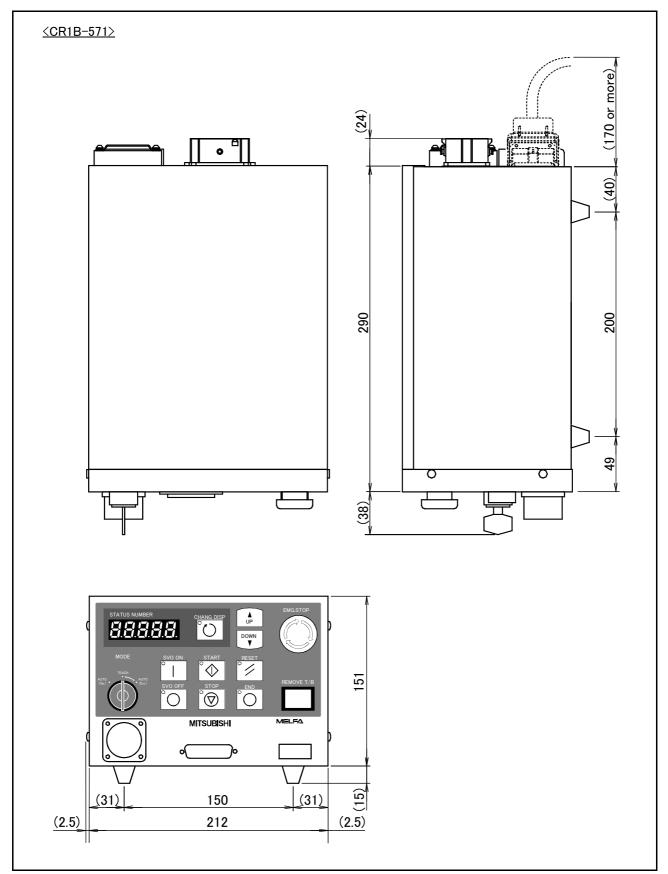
Outside dimensions of controller (CR1B-571 controller)
